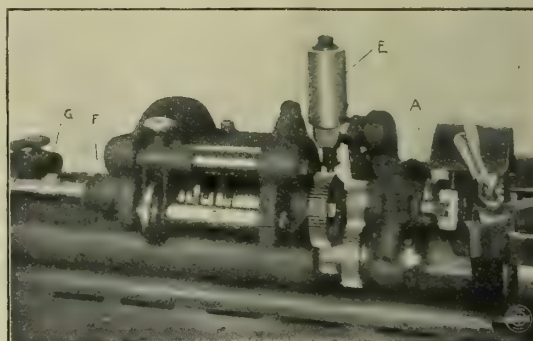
REAR VIEW SHOWING MASTER CAMS AND FOLLOWER ROLLS.
